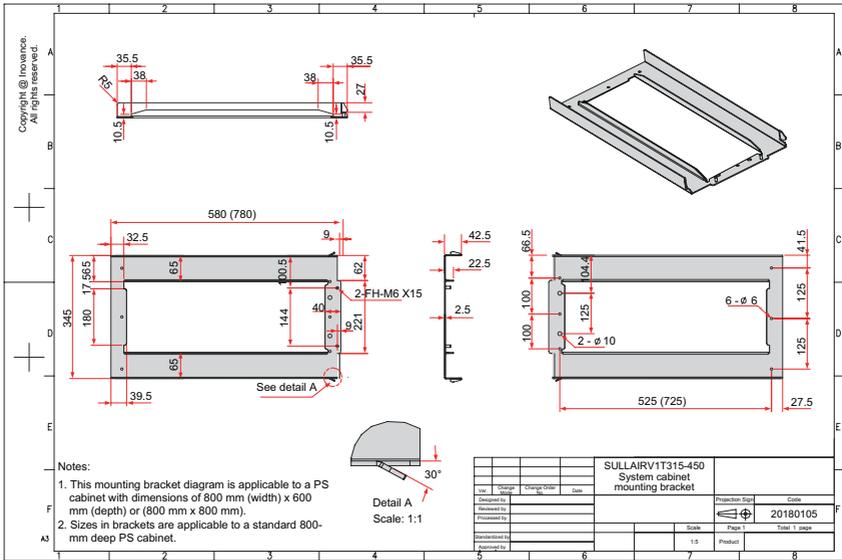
Dimensions of the mounting bracket for 315-450 kW models (standard configuration)
